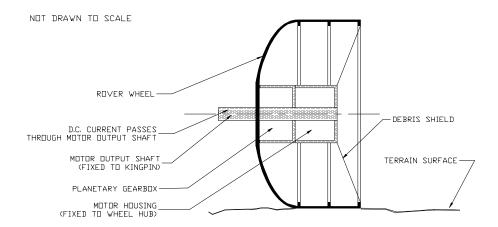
Drive Motor and Gearbox Mounting Schematic
